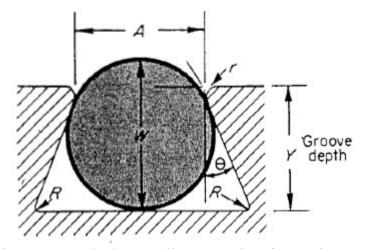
Standard Dovetail Groove Sizes for O-Ring Seals
